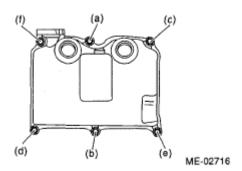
Identifying Rocker Cover Bolts - LH Side Courtesy of SUBARU OF AMERICA, INC.
